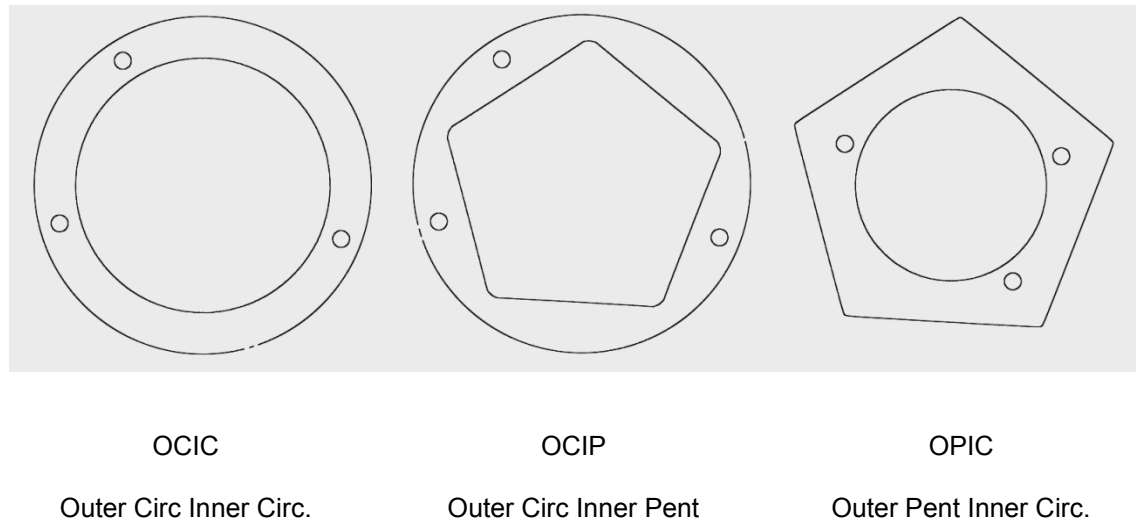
Surfaces of the multi cross-section workpiece as evaluated in GOM Inspect.
